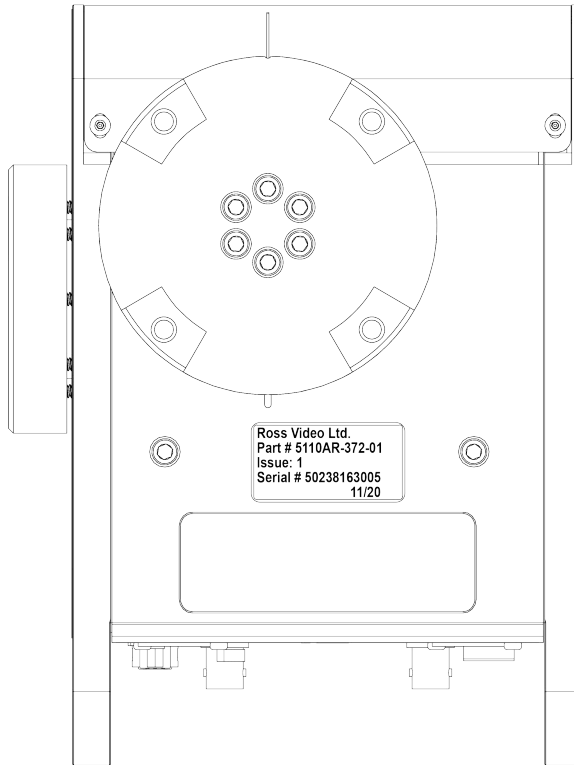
X350 Pan & Tilt Head (bottom view, camera cradle not shown)
